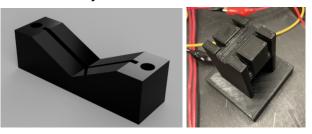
a) CAD model of Lens Holder, b) Image of CAWS Fiber Holder
